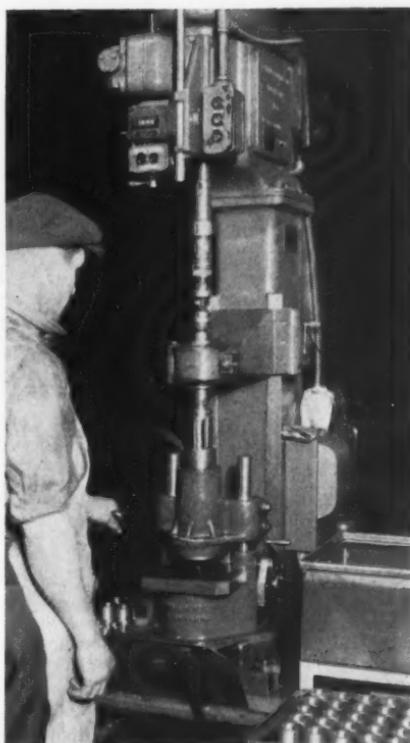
The interior surface of the Rollator is honed to a mirror finish with this Barnes honing machine and a 4-stone hone.
